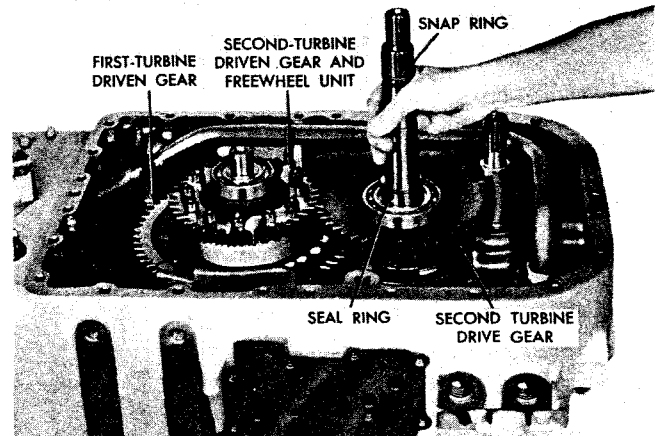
Removing (or installing) second-turbine gear, turbine driven gears and freewheel unit
